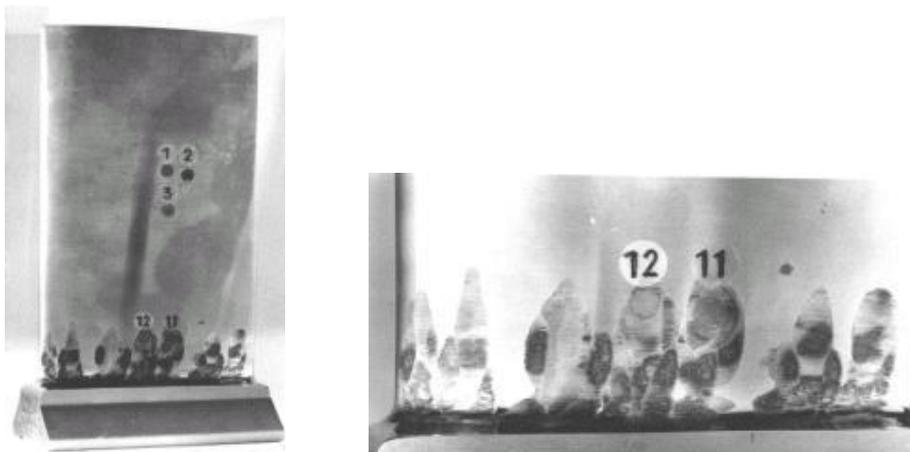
Corrosion and fatigue damage on rotor blade indicating EPR test locations: view of blade (left) and detailed view of blade base (right).
